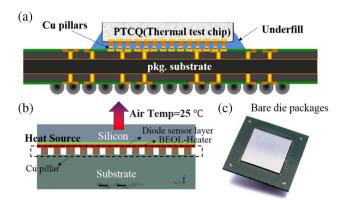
Details of the thermal test chip: (a) cross section view of the PTCQ package; (b) schematic of the heater and diode temperature sensor layer; (c) photograph of the bare die package.
